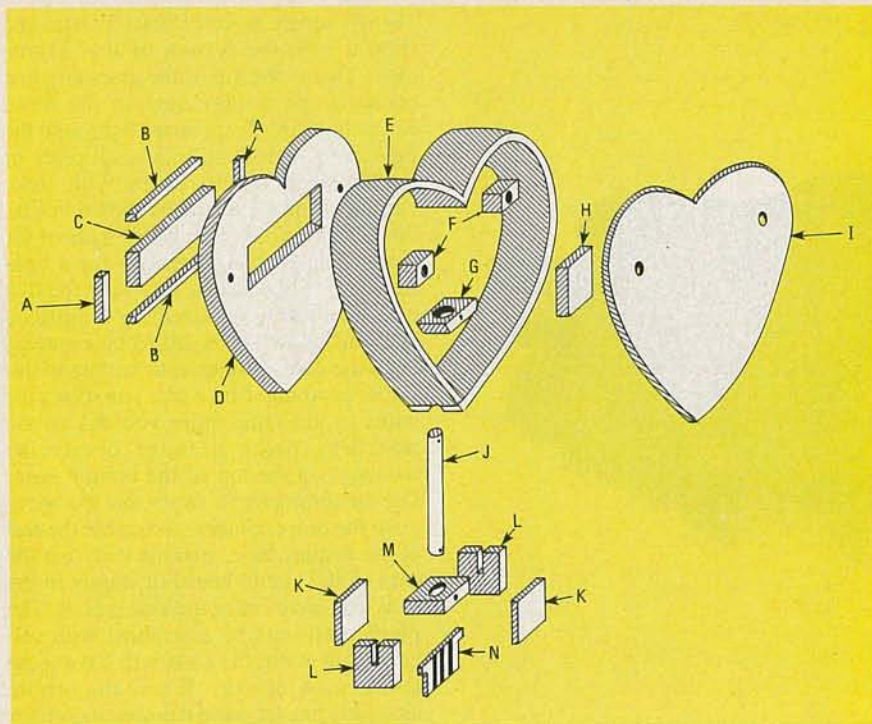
EXPLODED VIEW of the heart-shaped display case and its connector. The dimensions are given in Table 2.
